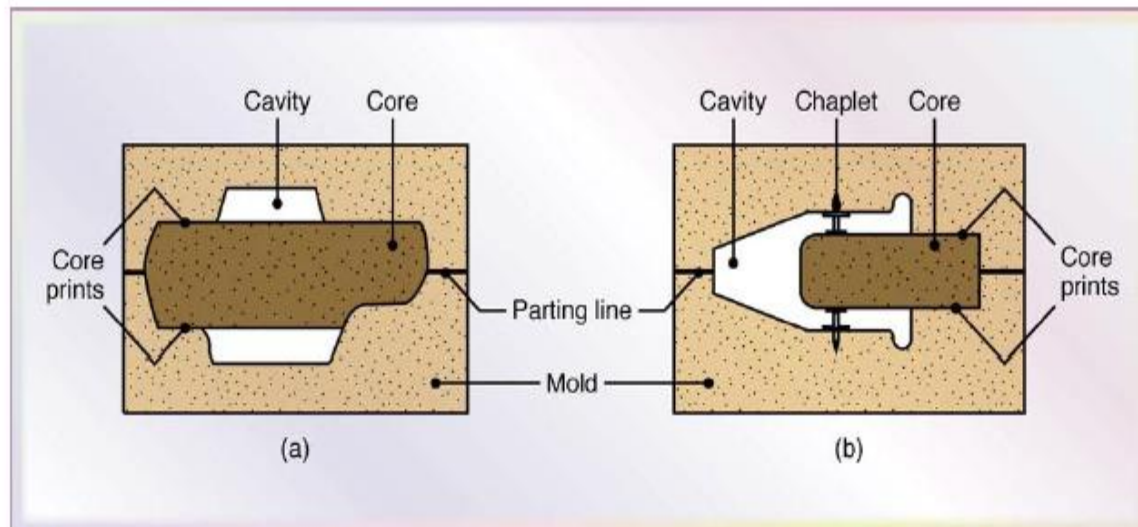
Examples of sand cores showing core prints and chaplets to support cores
